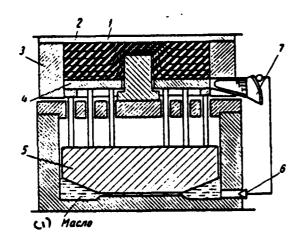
The diagram of rubber-pad forming with deep drawing: 1 - slider; 2 - rubber pad; 3 - container; 4 - clamp; 5 - drive of clamp; 6 - pressure regulator; 7 - the cam gear of control of pressure regulator.
